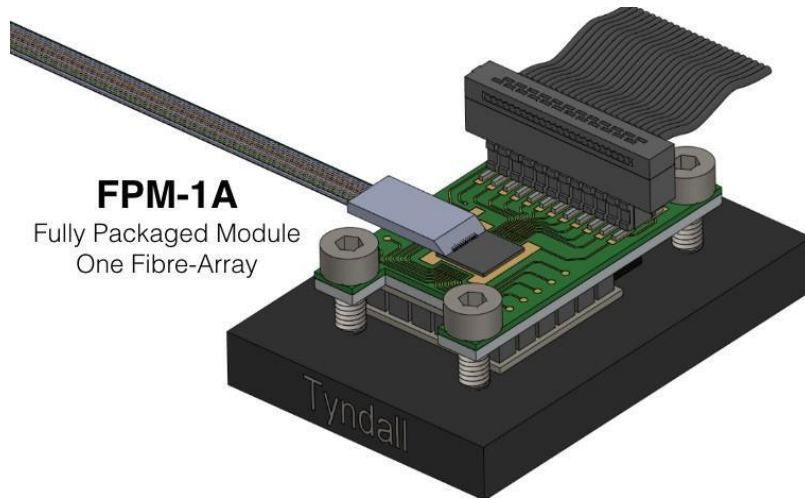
Schematic of the Tyndall-PCB showing how optical and electrical coupling is made to the Si-PIC, and where the integrated thermistor is located. The PCB can be integrated into a low-cost fully-packaged module (see Section 3.2) with a TEC and a mechanical base-plate.
